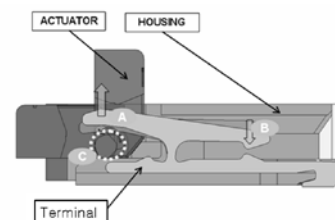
Shape of housing & actuator for 51pin FPC connector
